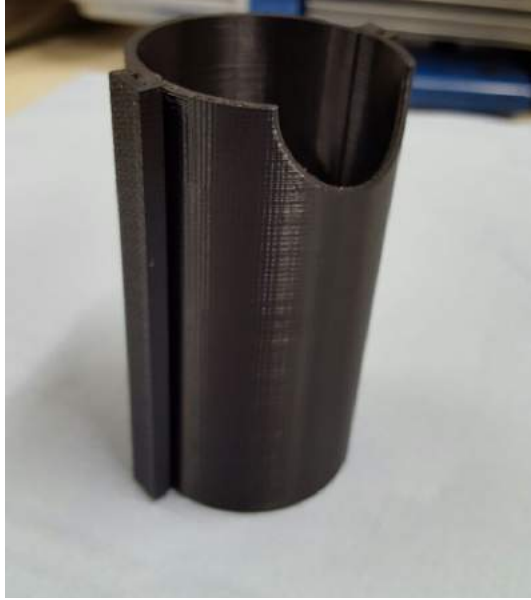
The assembled 3D printed hard shell which was used in the scope of our experiments.
